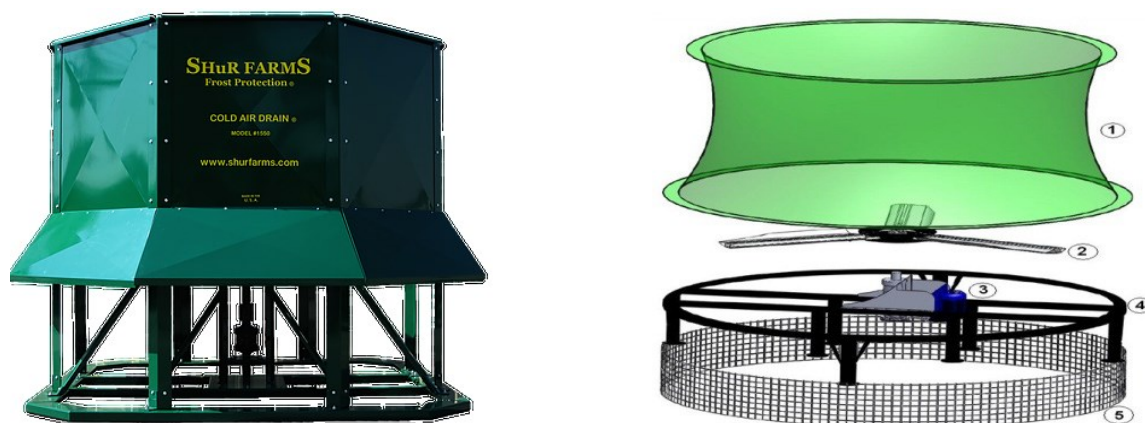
Left: selective inverse sink (SIS) system or upward-blowing wind machine. Right: Parts of upward-blowing wind machine; 1.Fan chimney, 2.Fan kit, 3.engine, 4.construction 5.Protection cage (taken from Vardar and Taskin, 2014).
